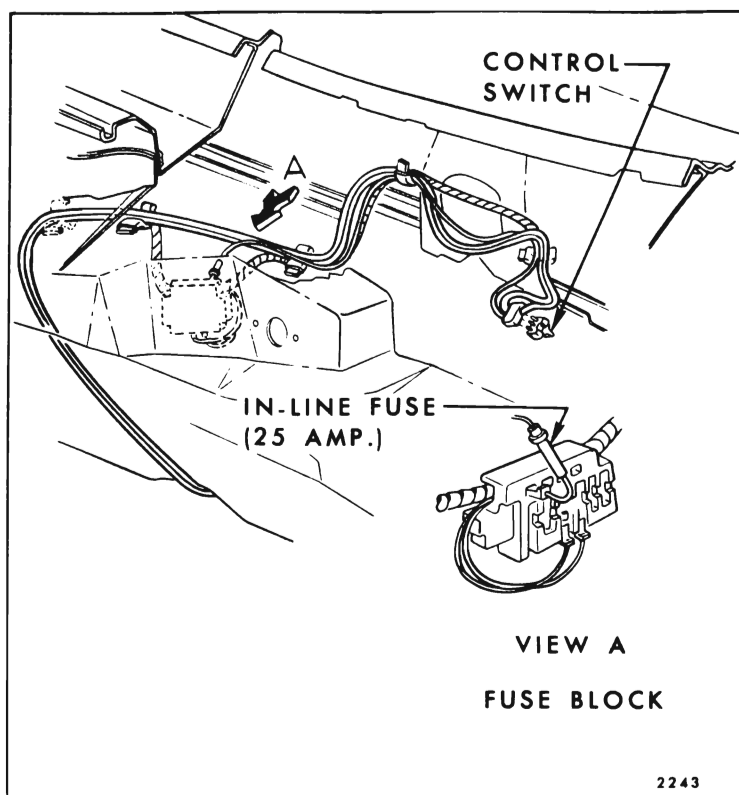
Electric Folding Top Front End Wiring - Corvair
